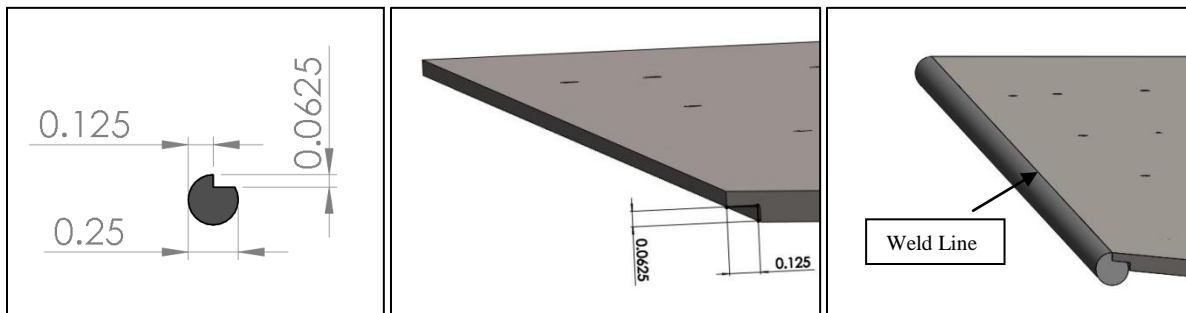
Model Assembly - Leading edge Spar to Flat Plate
